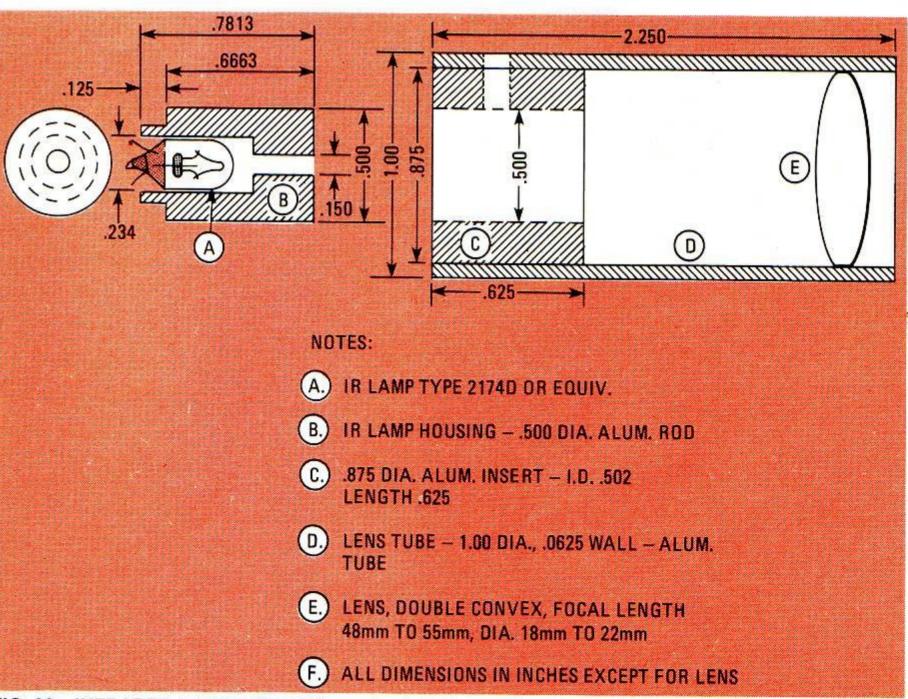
INFRARED LAMP HOUSING can be held in position in lens tube by set screw, once proper position has been determined.
